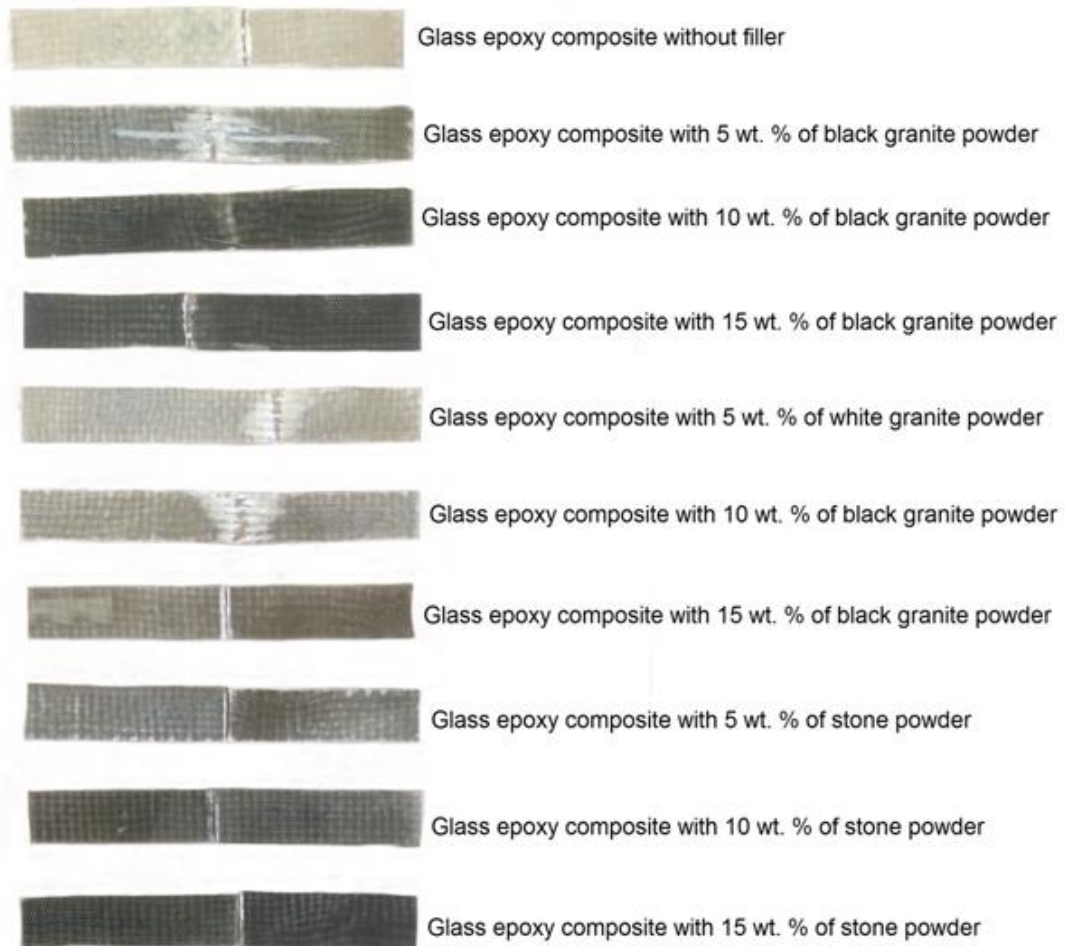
Fractured glass epoxy composite specimens with and without fillers after the tensile test
